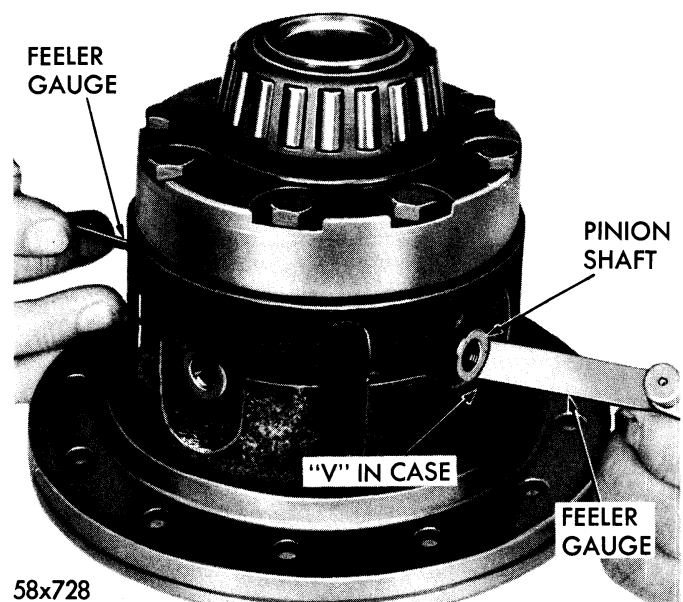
Checking Clearance Between Pinion Mate Shafts and Case
